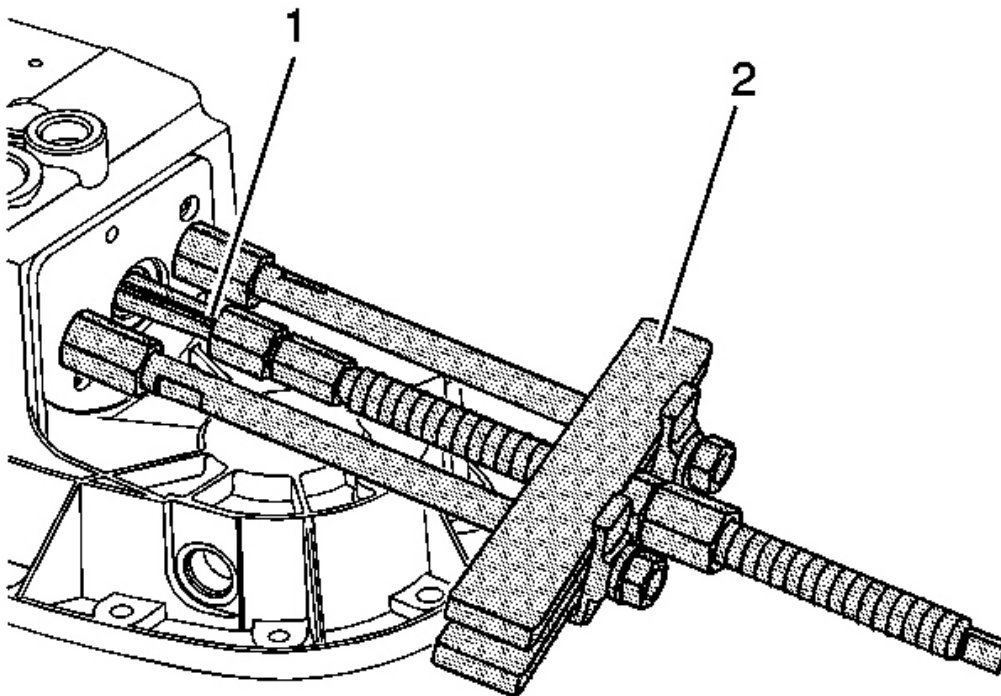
Removing The Rear Output Shaft Bearing From The Rear Case
